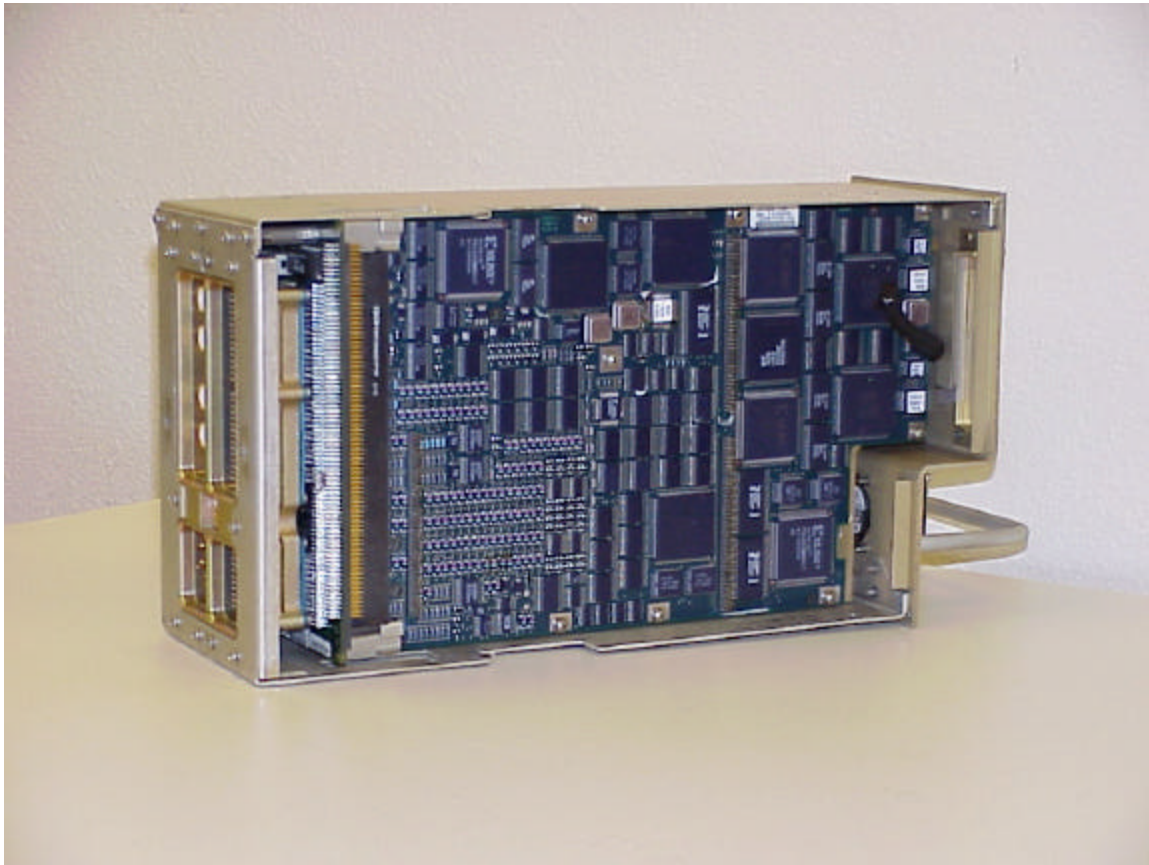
View of Unit Side, A7 TAWS Removed, A2 Processor Assembly Showing
